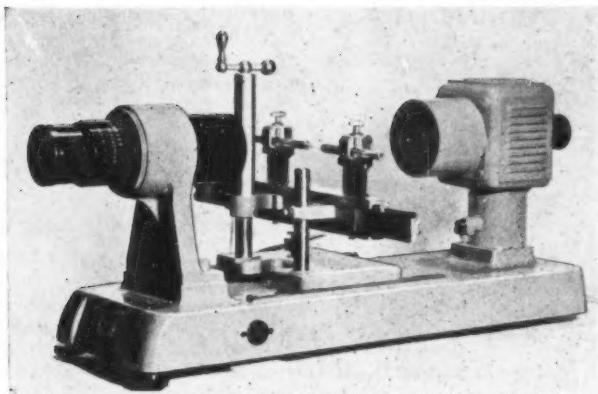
The No. 3 Westminster Direct-viewing Horizontal Projector
